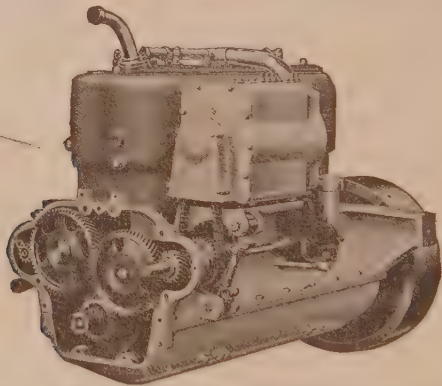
Entz single unit starting and lighting system; view showing mounting of motor generator on engine and silent chain drive.
